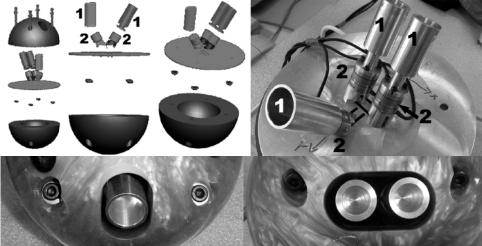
Instrumented bowling ball, design, construction, and assembled ball; 1: finger and thumb holes, 2: transducers
